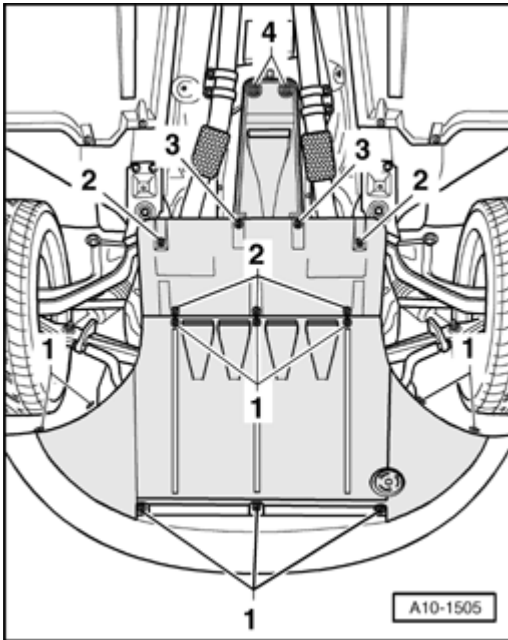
Loosening Mounting Parts And Removing Noise Insulation
